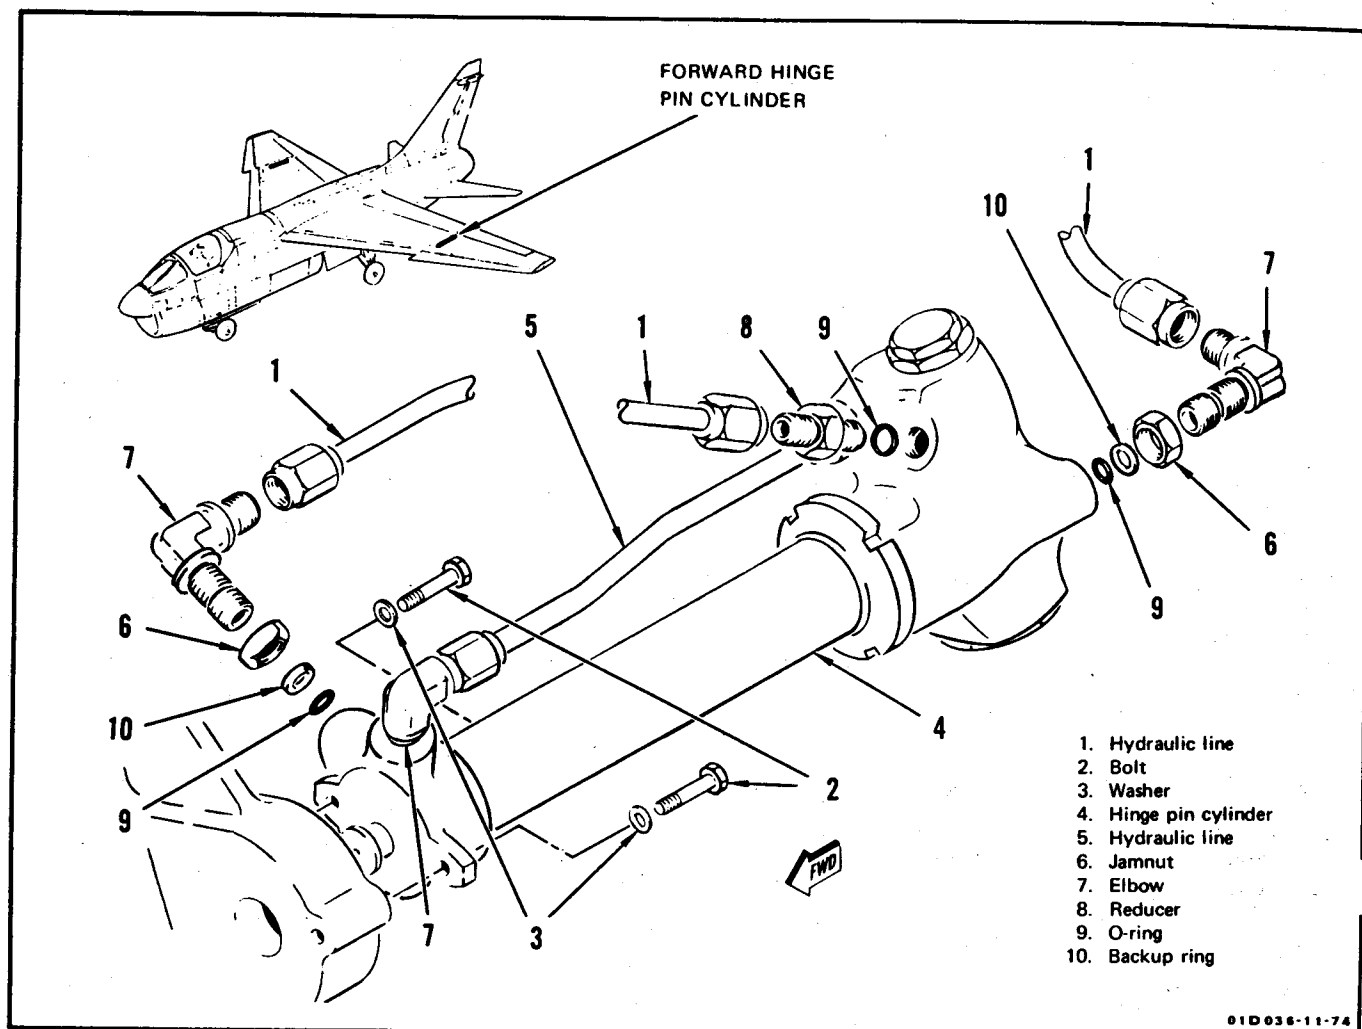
Forward Hinge Pin Cylinder Removal and Installation
